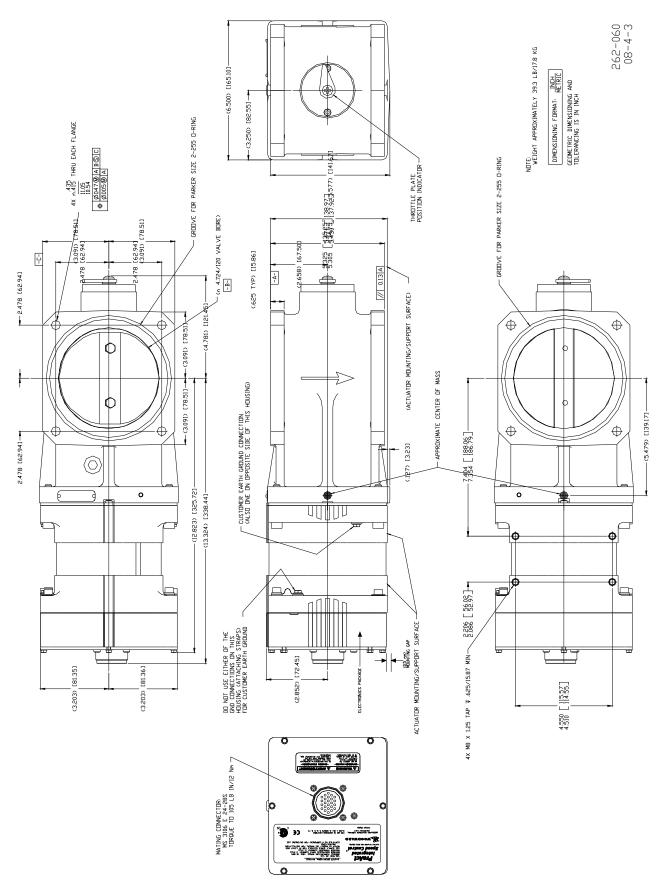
Outline Drawing of PISC ITB 120 mm
